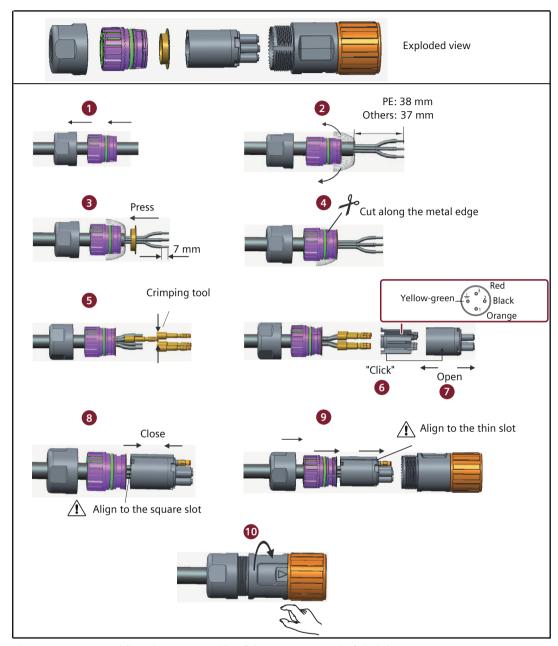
Assembling the power cable of the 1FL2 motor shaft height 45, 65, or 90
